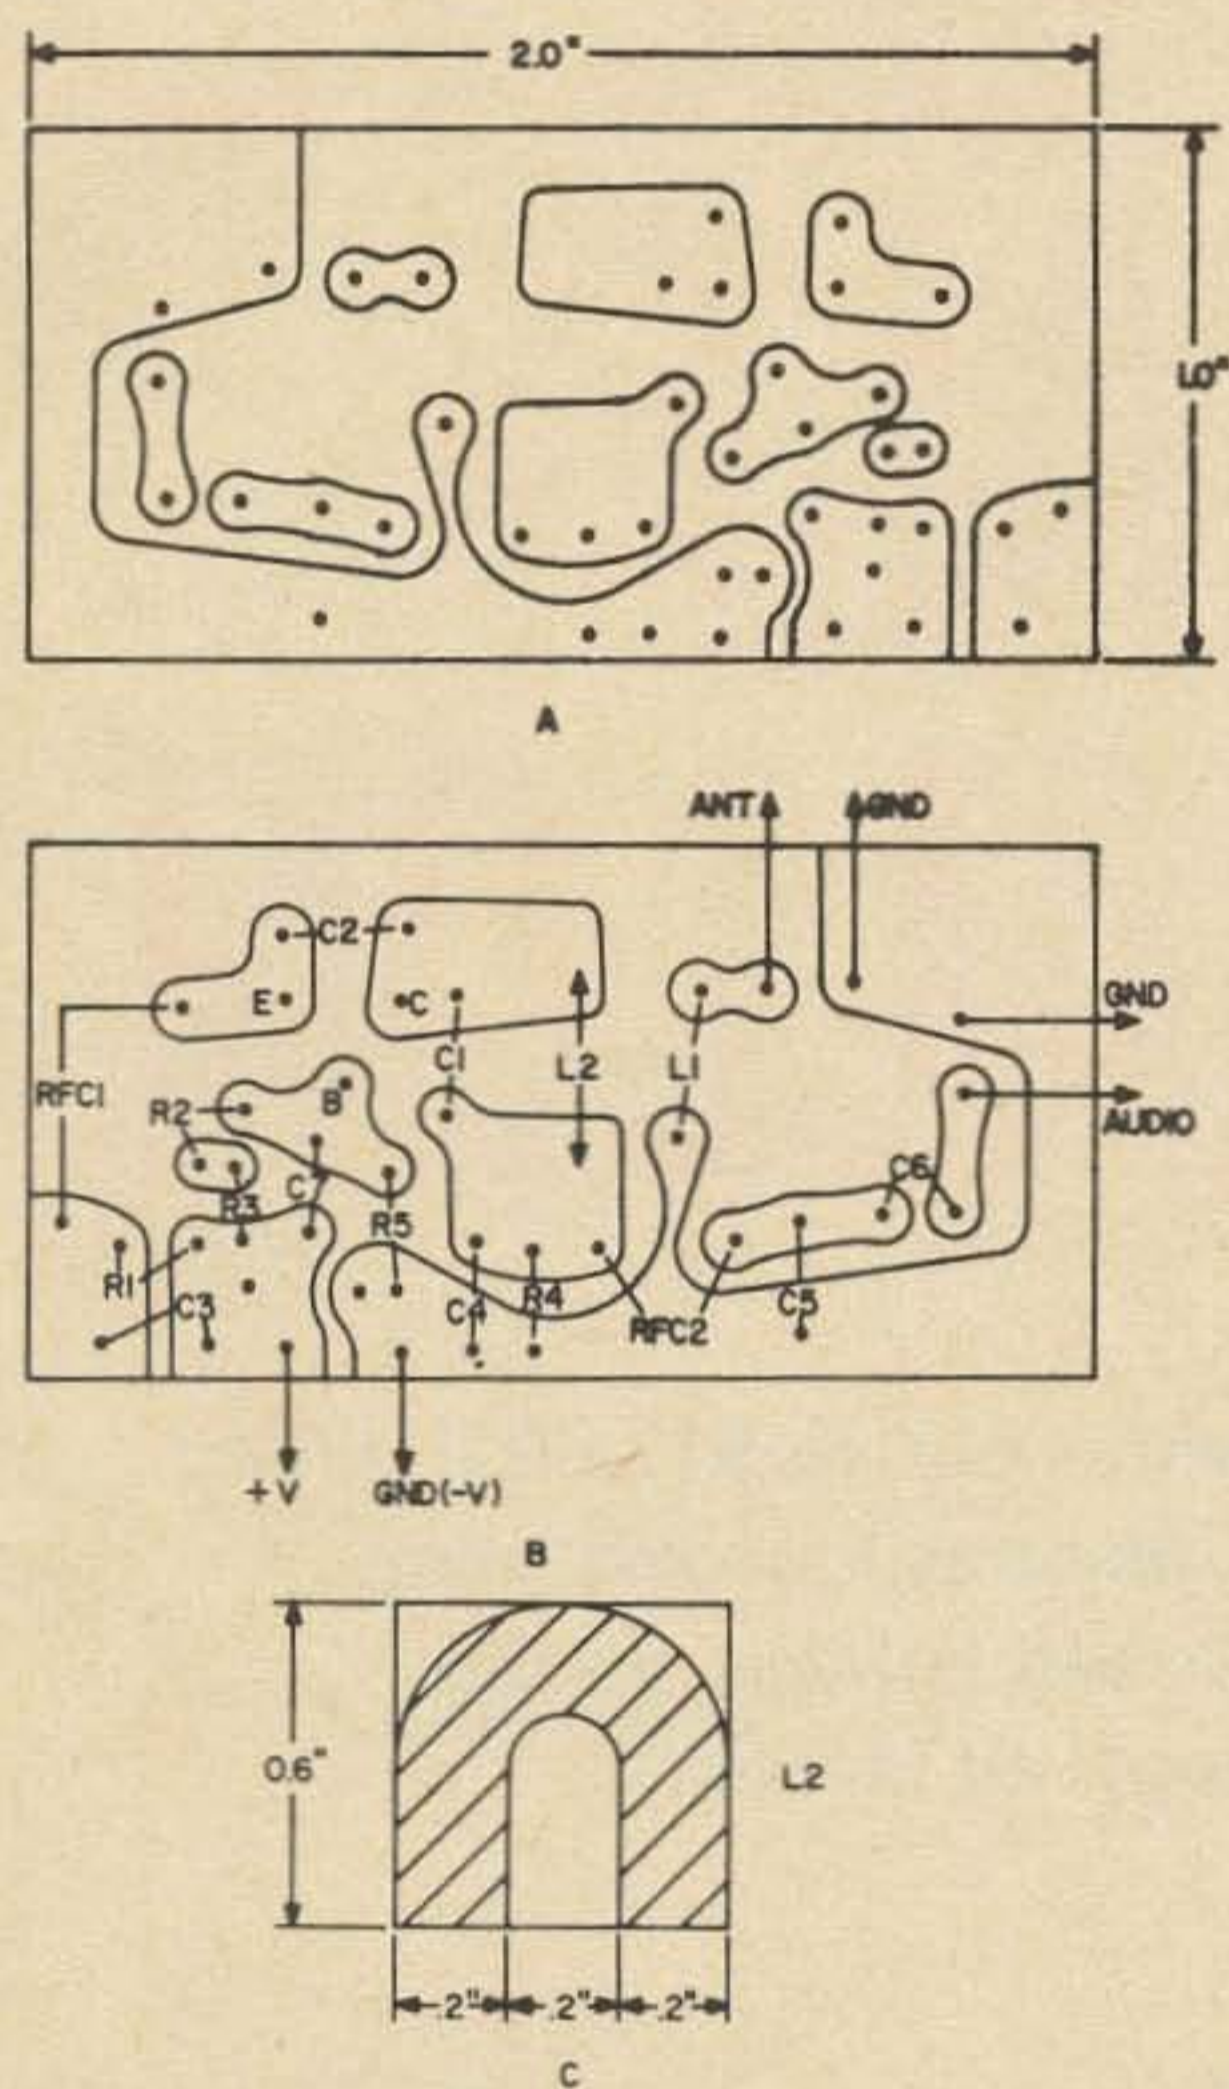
Suggested PC board layout for the receiver. The foil side is shown in 2A and parts location in 2B. The tank coil (L2) is also made from PC material and shown in 2C.
